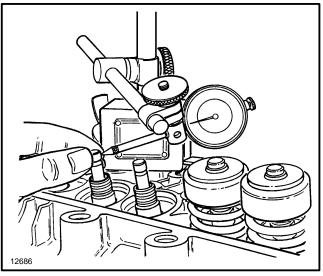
CHECK THE CLEARANCE BETWEEN VALVE GUIDE AND VALVE
